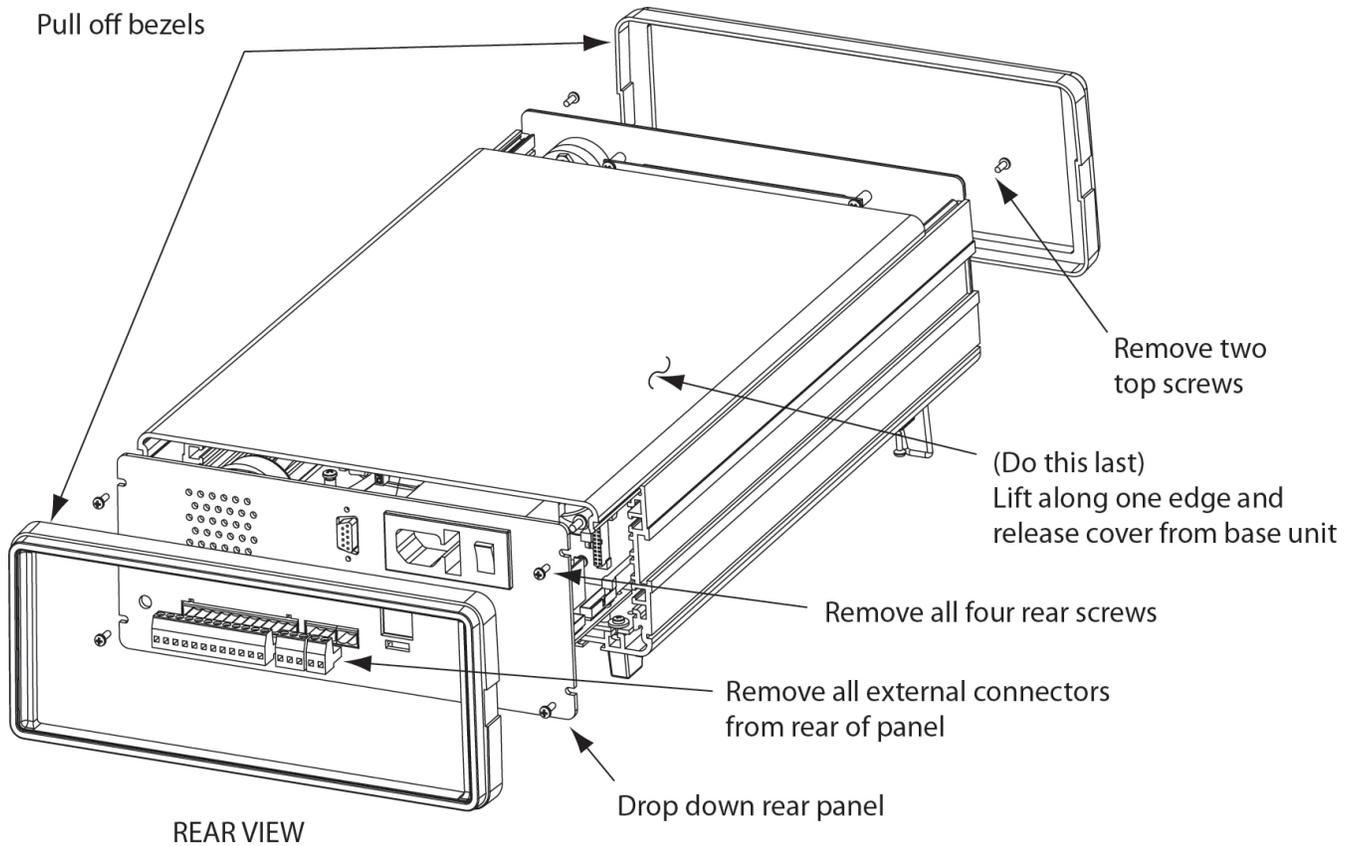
Removing the H25-IR Top Cover and Rear Panel
